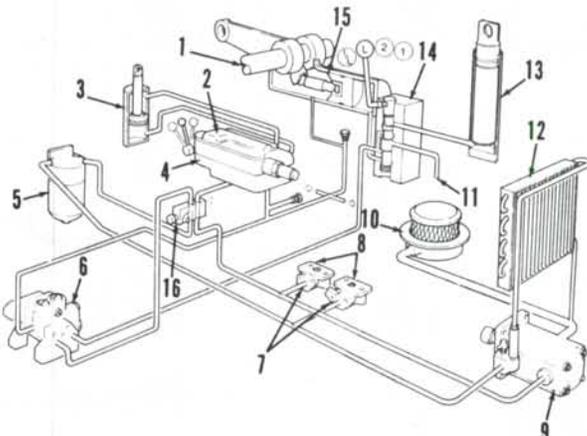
Schematic of hydraulic system with tandem front mounted hydraulic pumps. Refer to legend for Fig. 234 except for combining valve (16).
